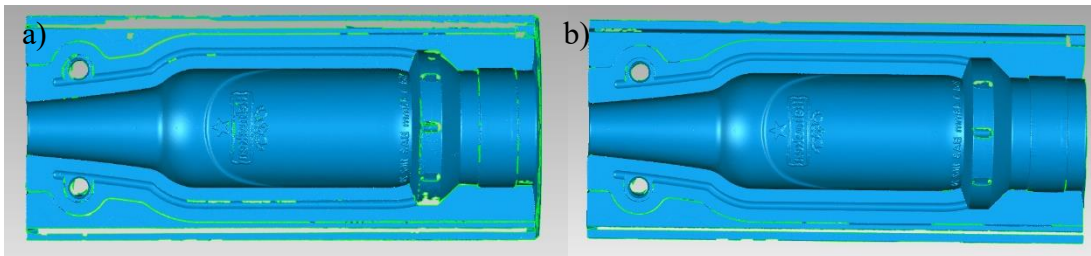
STL of the mould halves: a) Without spray; b) With spray
